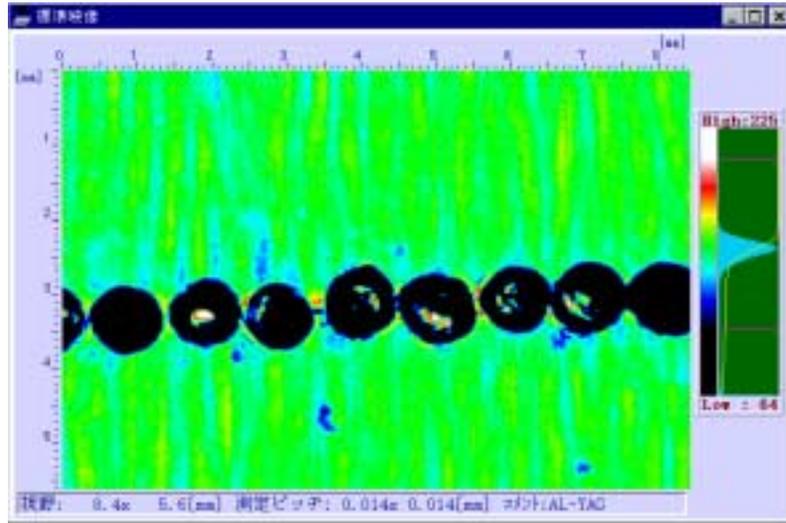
Surface of aluminum plates spot-welded using a YAG laser
